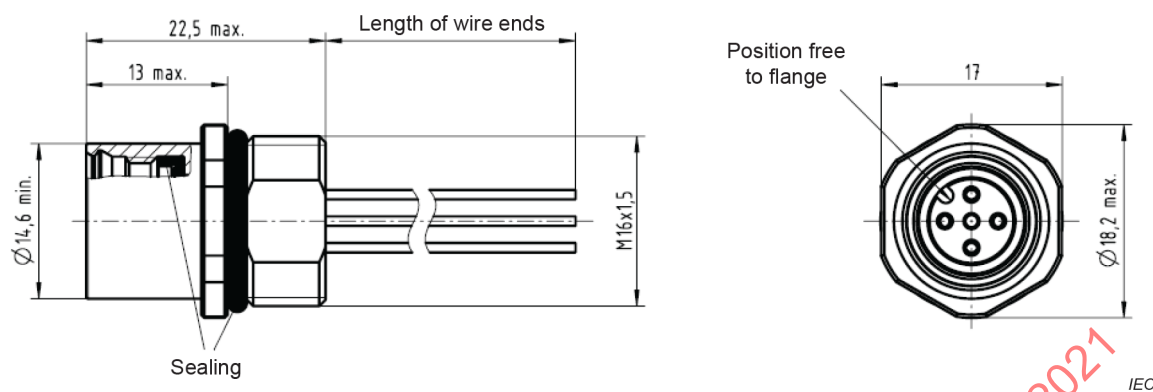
Fixed connector, female contacts, with M12 screw locking and outer push-pull locking, with wire ends, single hole rear mounting thread M16 × 1,5
